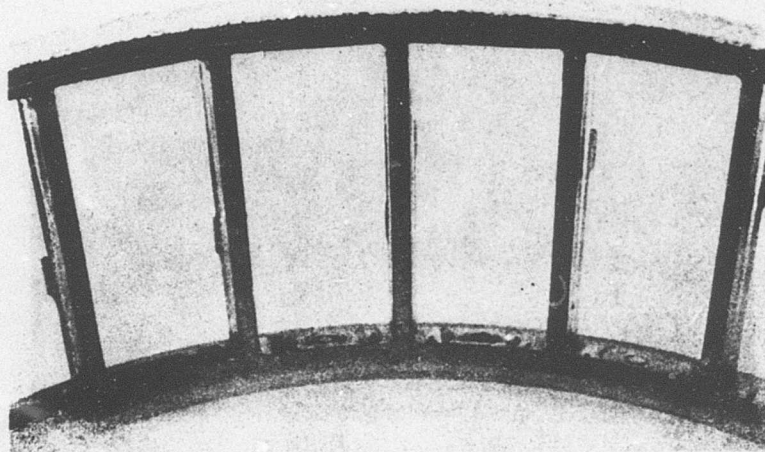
View of Cage Pockets - Bearing S/N 73-59.
